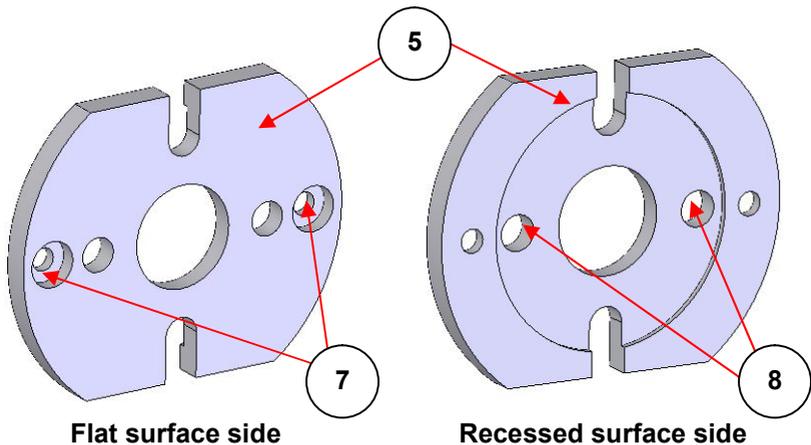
Front cover plate (both sides seen) to hold High Pressure Liquid Cell when placed in the Electrical Heating Jacket GS20730
